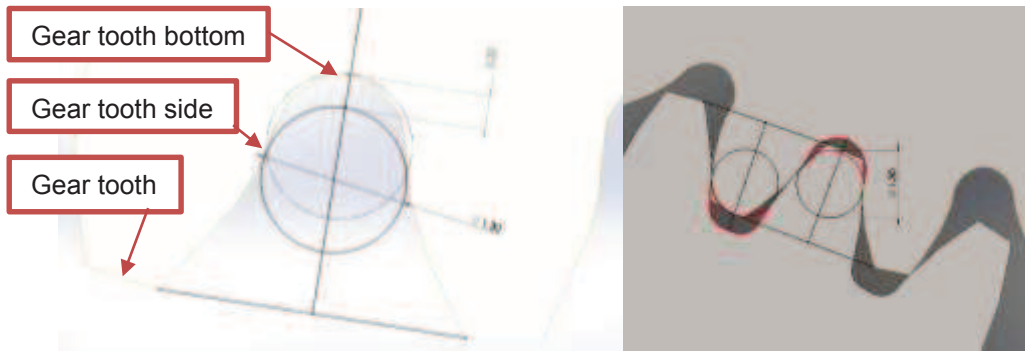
Jet stream diameter is larger than the bottom of the gear tooth and affecting the contact of module 1 gear sets
